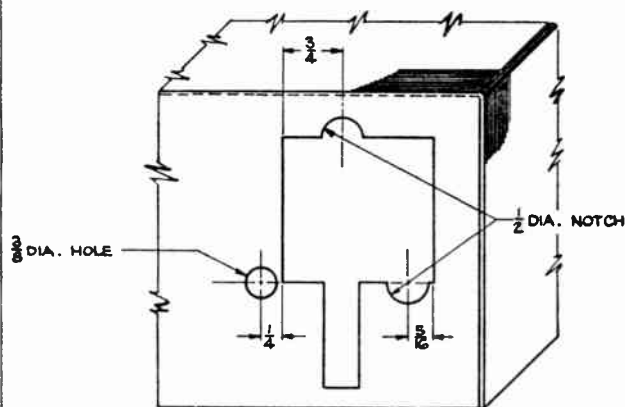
See "Removing Bottom Cover of Tuner" Page
